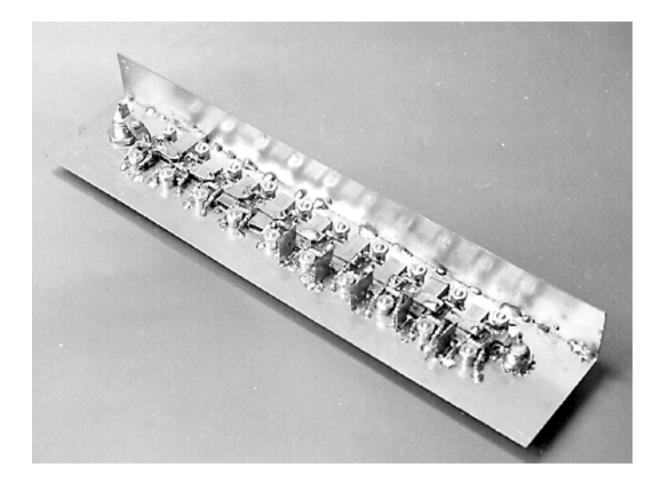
Solder one of the 1-inch-wide chassis side pieces in place to make the assembly more rigid. Solder the side piece to the edge of the top plate that faces the "through" side of the switches; this makes the rest of the assembly easier.
